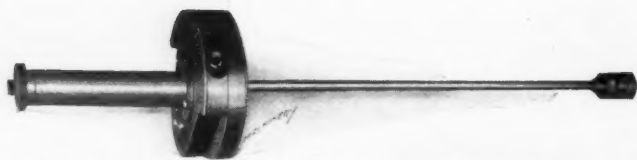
Woods Boring and Grinding Attachment without Countershaft
